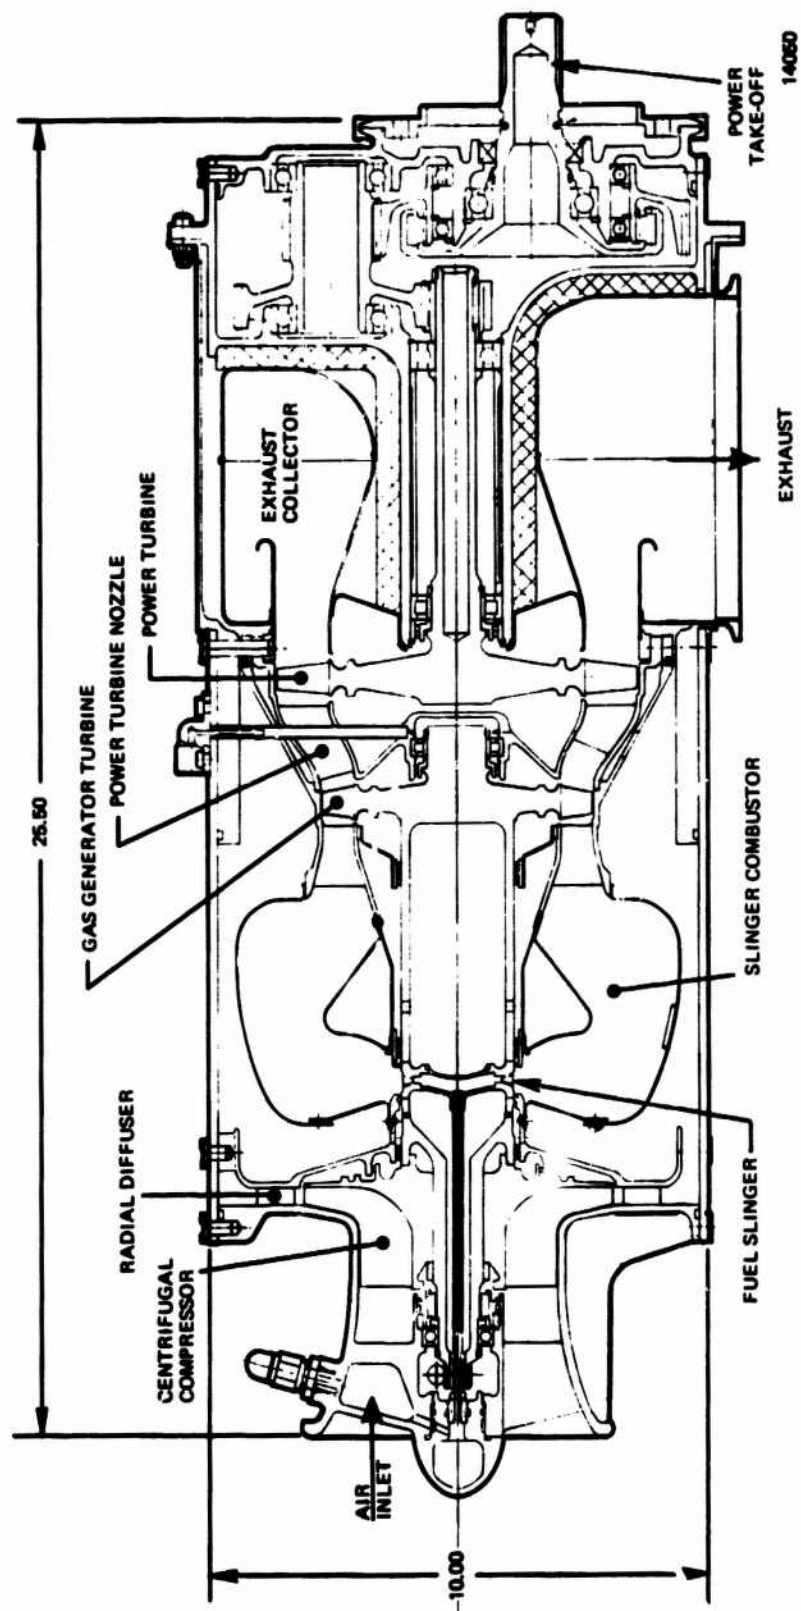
JFS206-A2 Jet Fuel Starter Alternate Design.
